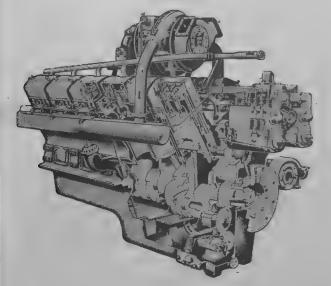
MERCEDES-BENZ Diesel engine MB 820 Bb - sectional view.
